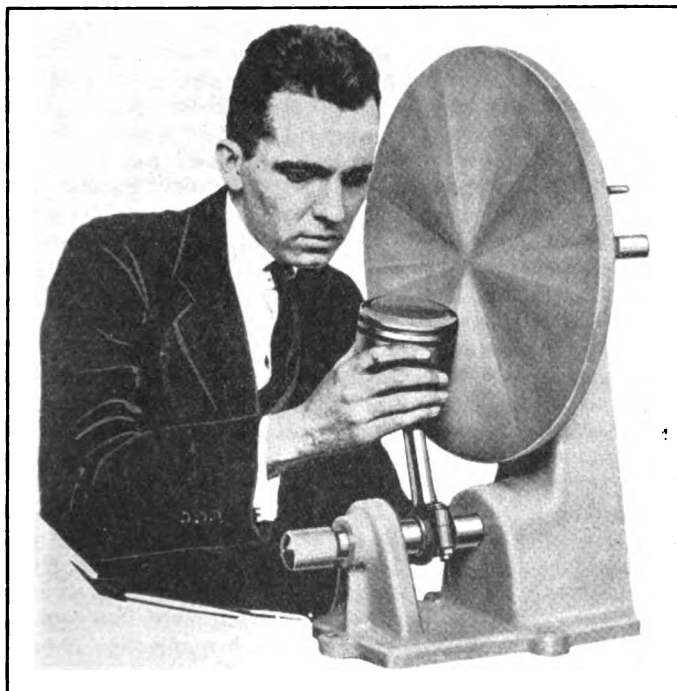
ALIGNING A PISTON AND PISTON-ROD
